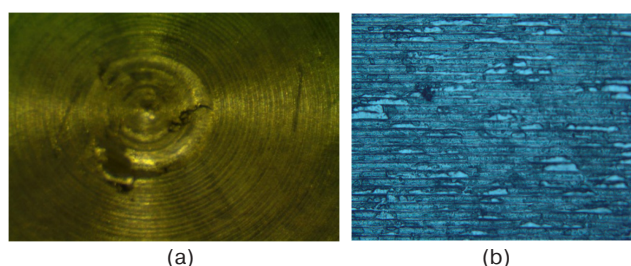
The surface of the original workpiece with material tearing out during turning and machining and chips on its surface (a); the surface obtained after forging with interlayers of inclusions (b)
